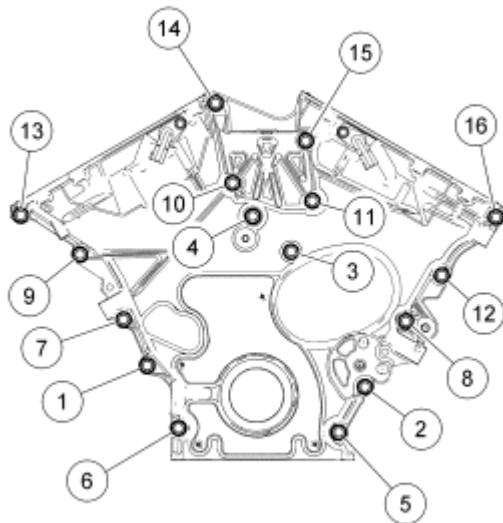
Locating Tighten Sequence Of Engine Front Cover Bolts
